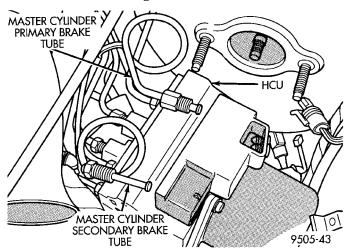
Primary And Secondary Brake Tubes From Master Cylinder To HCU
